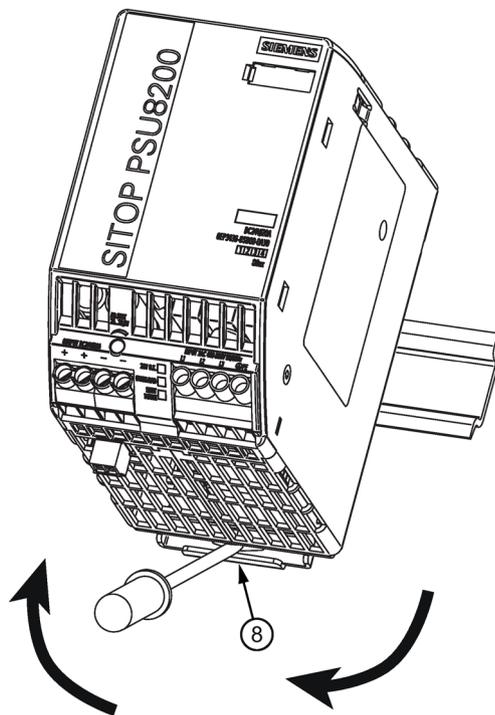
Mounting/removal (example 6EP3436-8SB00-0AY0)
